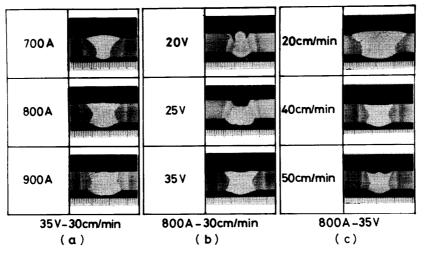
Typical macro sections in case of changing major welding parameters.
